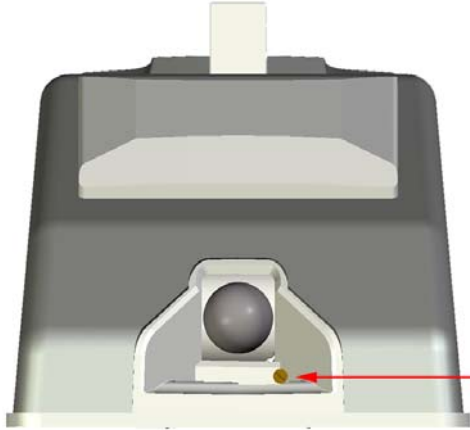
RF30-EM – PIR sensor and screw to adjust the PIR sensor
